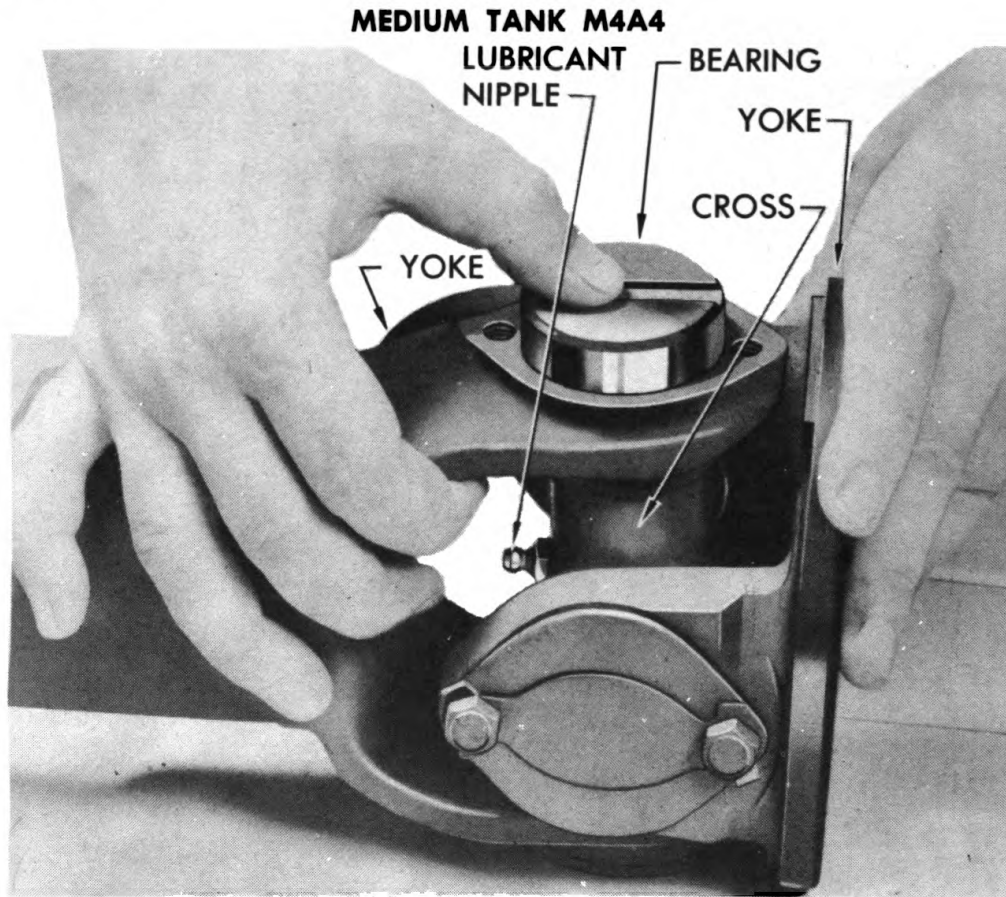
Installing Universal Joint Bearing RA PD 24414
